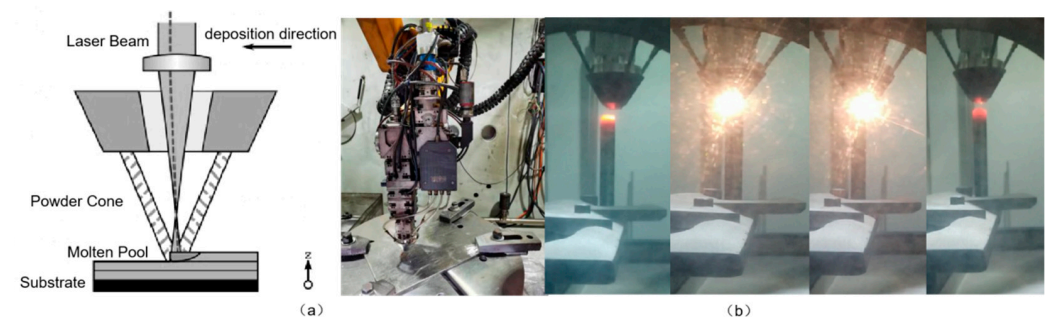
Additive manufacturing scenario: (a) metal additive manufacturing printer nozzle system; (b) image when 3D printing.
